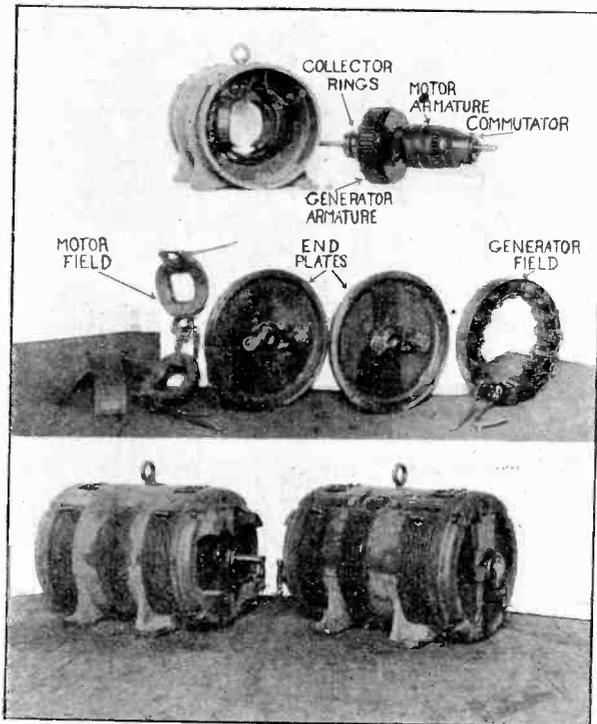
Exploded and Assembled views of a Two-Kilowatt Five Hundred cycle Motor Generator having Revolving Armature
